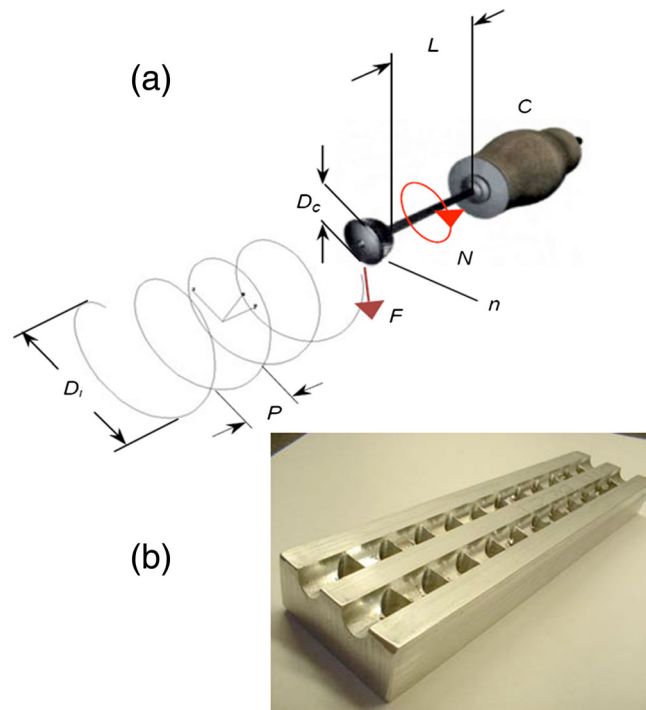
a The Orbitool deburring process. b 6061-T6 aluminum work part (Adapted from [97])
